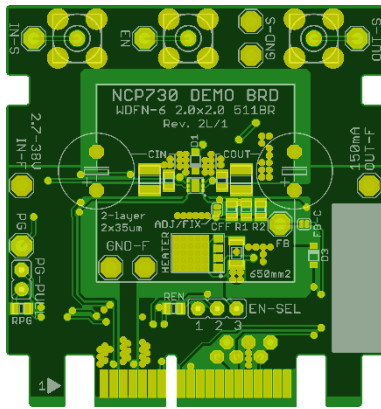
WDFN-6 2x2 Demo Board (2 layer, rev. 1) – PCB Top Layer
